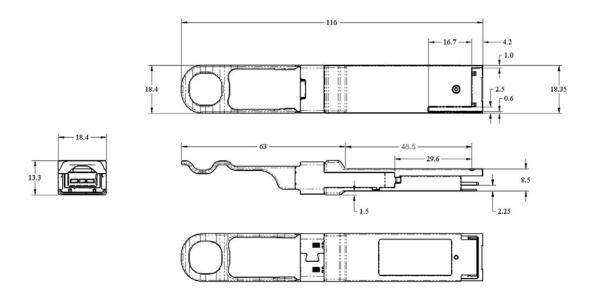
FTLX00Q1D4BNL Mechanical Dimensions.
